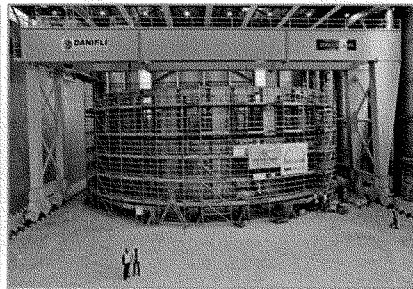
The ITER scale is apparent in the Cryostat Workshop, where Larsen & Toubro is supervising the assembly and welding of the lower cylinder.
